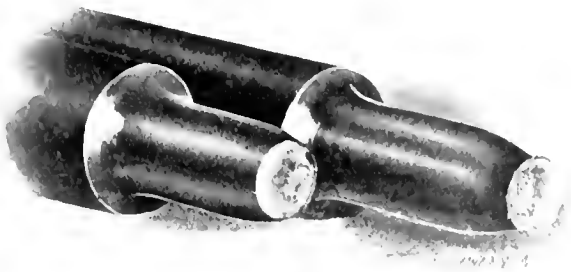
Test Bar, 1.2 inch Diameter, Vanadium Crank-shaft Steel. Cup Fracture.
